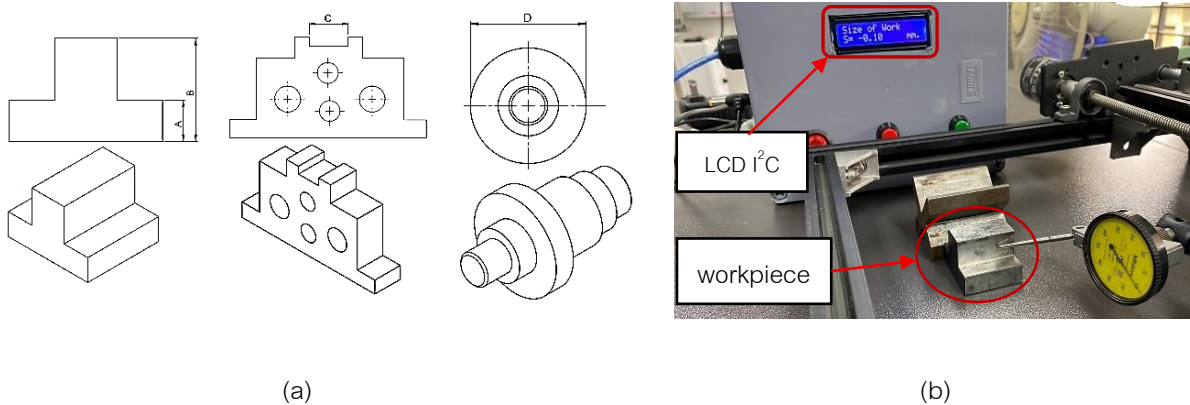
(a) Sample workpiece used for testing and (b) workpiece measurement and display of results via the LCD screen.
